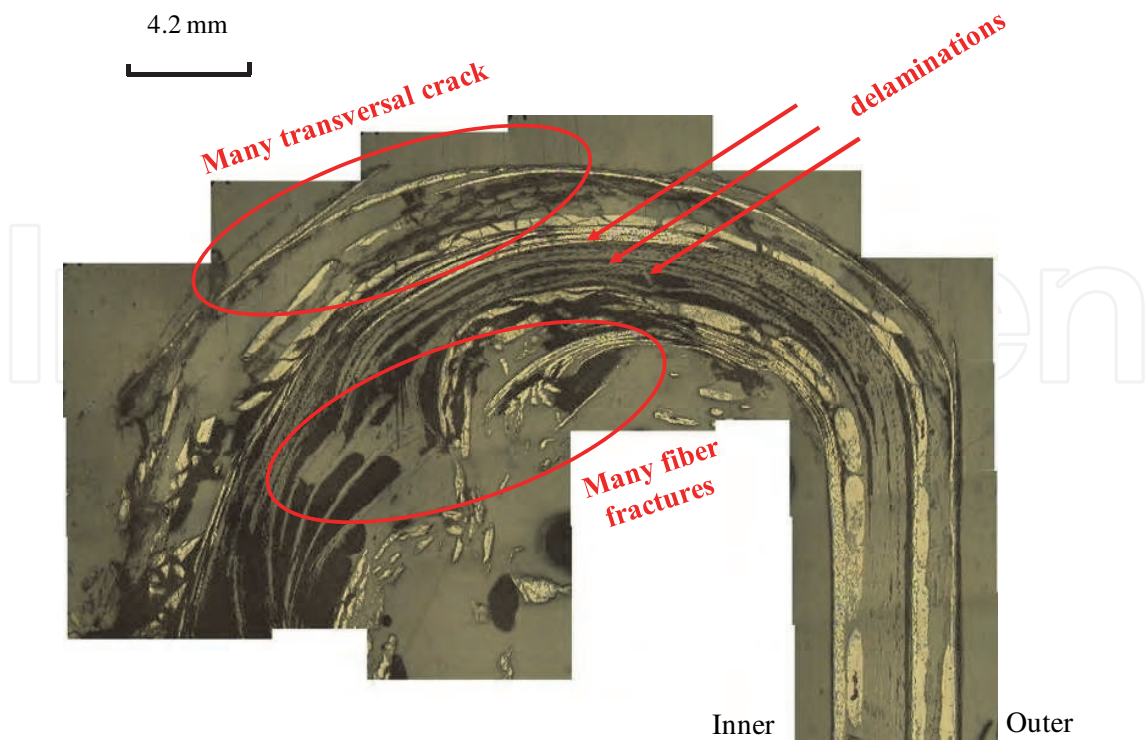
Observation of flat wall of Carbon MWK tube after impact test illustrating that the fronds were being bent towards inside only and many fracture generated (S-Inner 2 device trigger).
